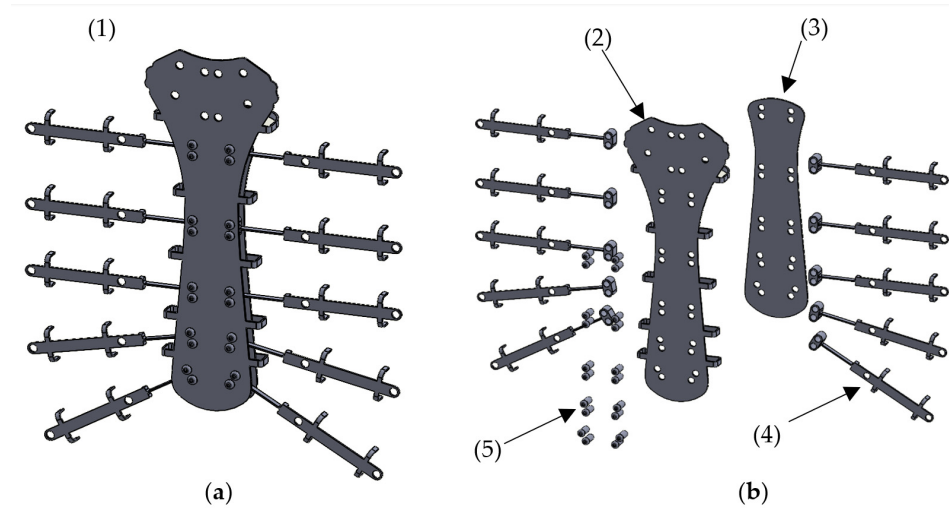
Tridimensional model of a sternum endoprosthesis. (a) sternum endoprosthesis full assembly; (b) expanded view; (1) sternum endoprosthesis; (2) sternum closure fixation plate; (3) rear support plate; (4) compliant mechanism; (5) fixation screws.
